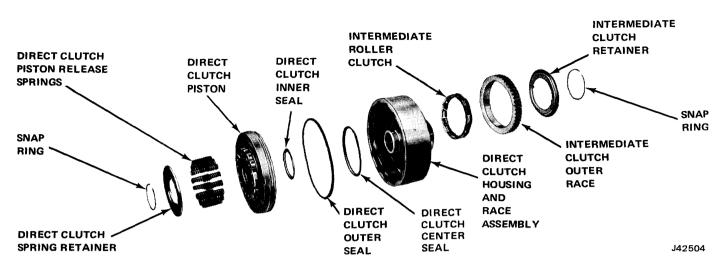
Intermediate Roller Clutch and Direct Clutch Components
